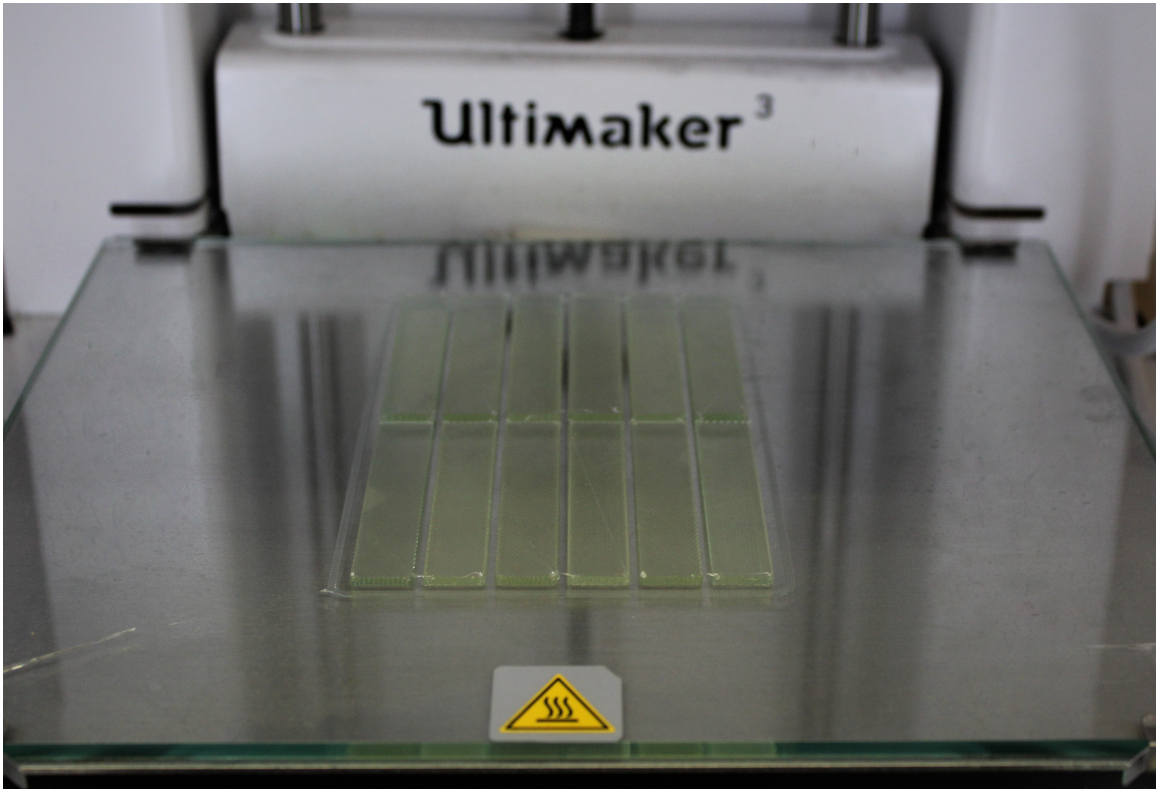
A batch of 12 printed samples (115% infill and 45° raster angle)
